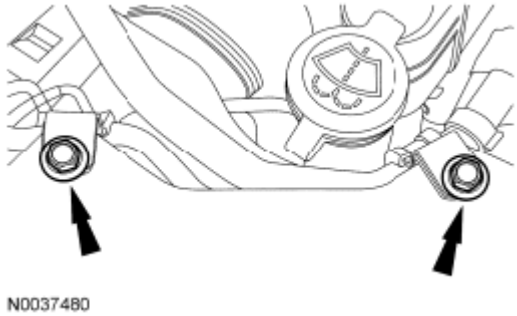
Locating A/C Tube Retaining Clamp Bolts
